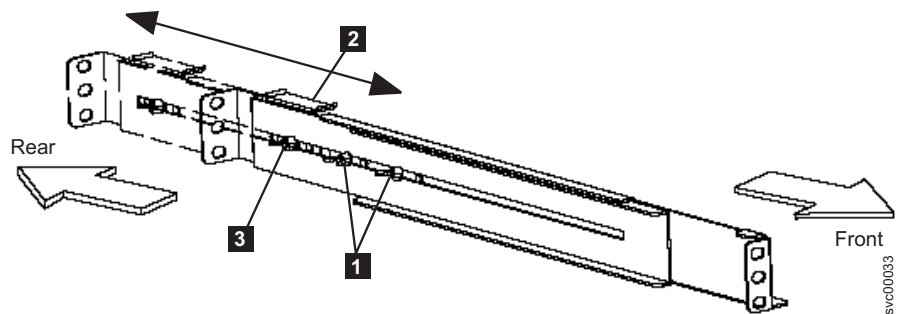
Adjusting the rail depth on the 2145-1U uninterruptible power supply
